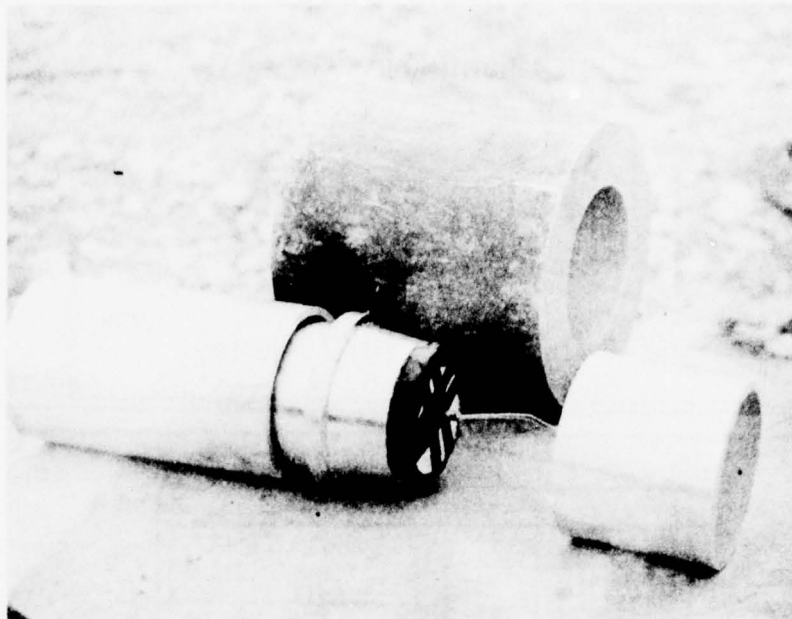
Internal Collar Weld Configuration and Welded Specimen
